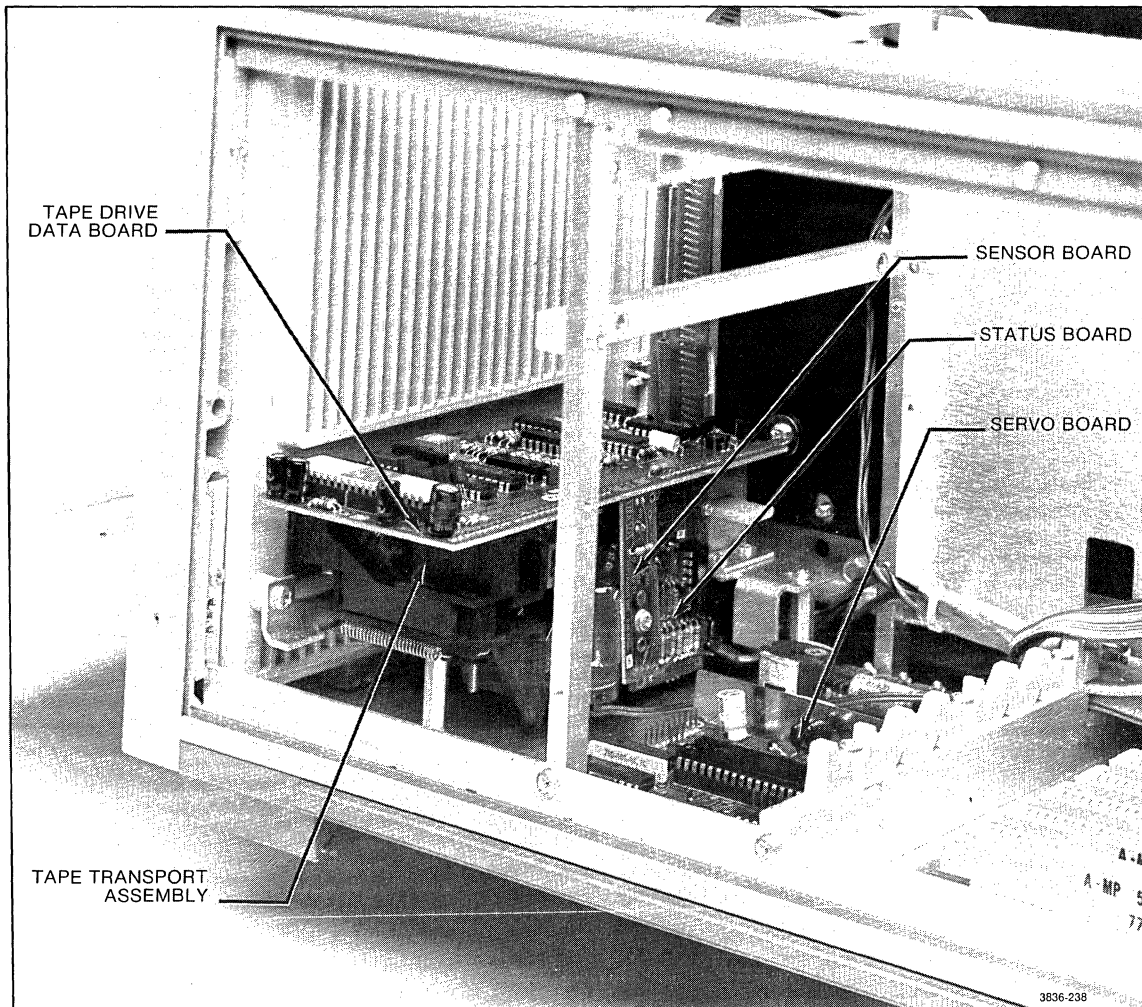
Location of the four circuit boards and the tape transport assembly in the tape drive. (This figure shows the Monochrome DAS. The Color DAS is similar.)
